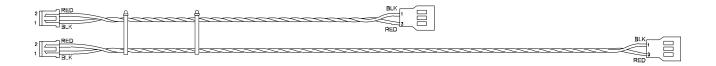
VLX3 Wash APS Fan Cable Assembly
